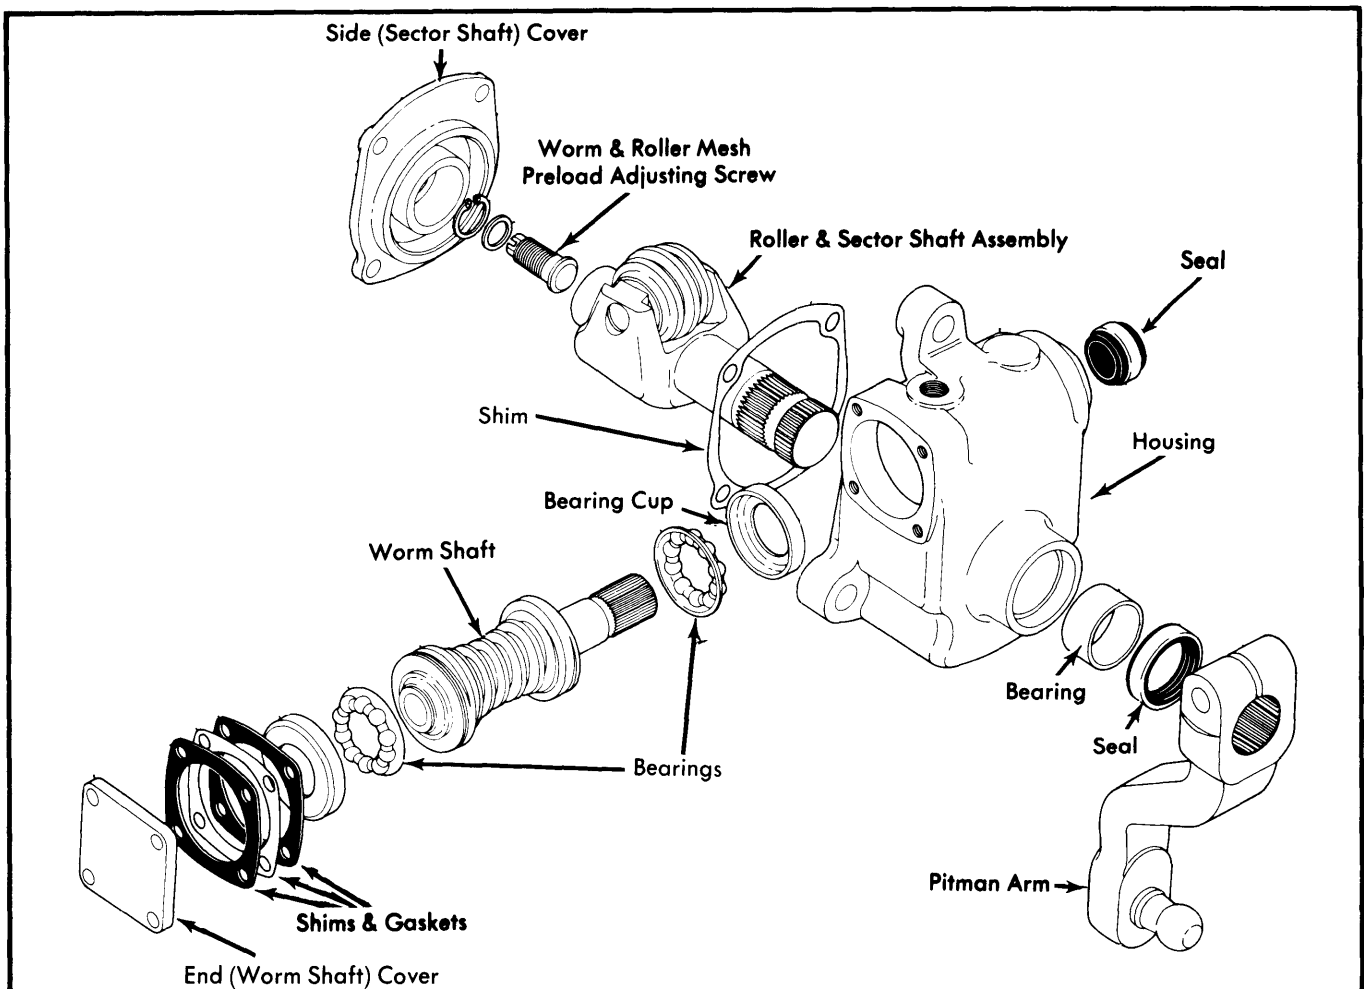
Disassembled Gemmer/Ross Worm & Roller Steering Gear
